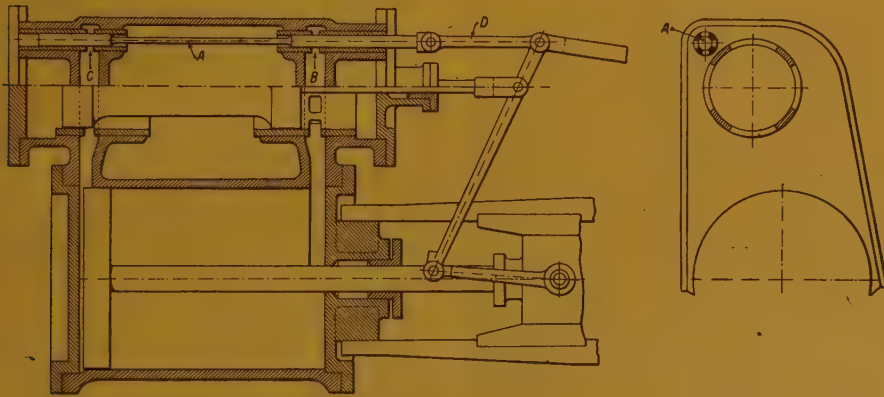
Details of cylinder, steam chest and valve gear arrangement for "3-30" locomotive.
